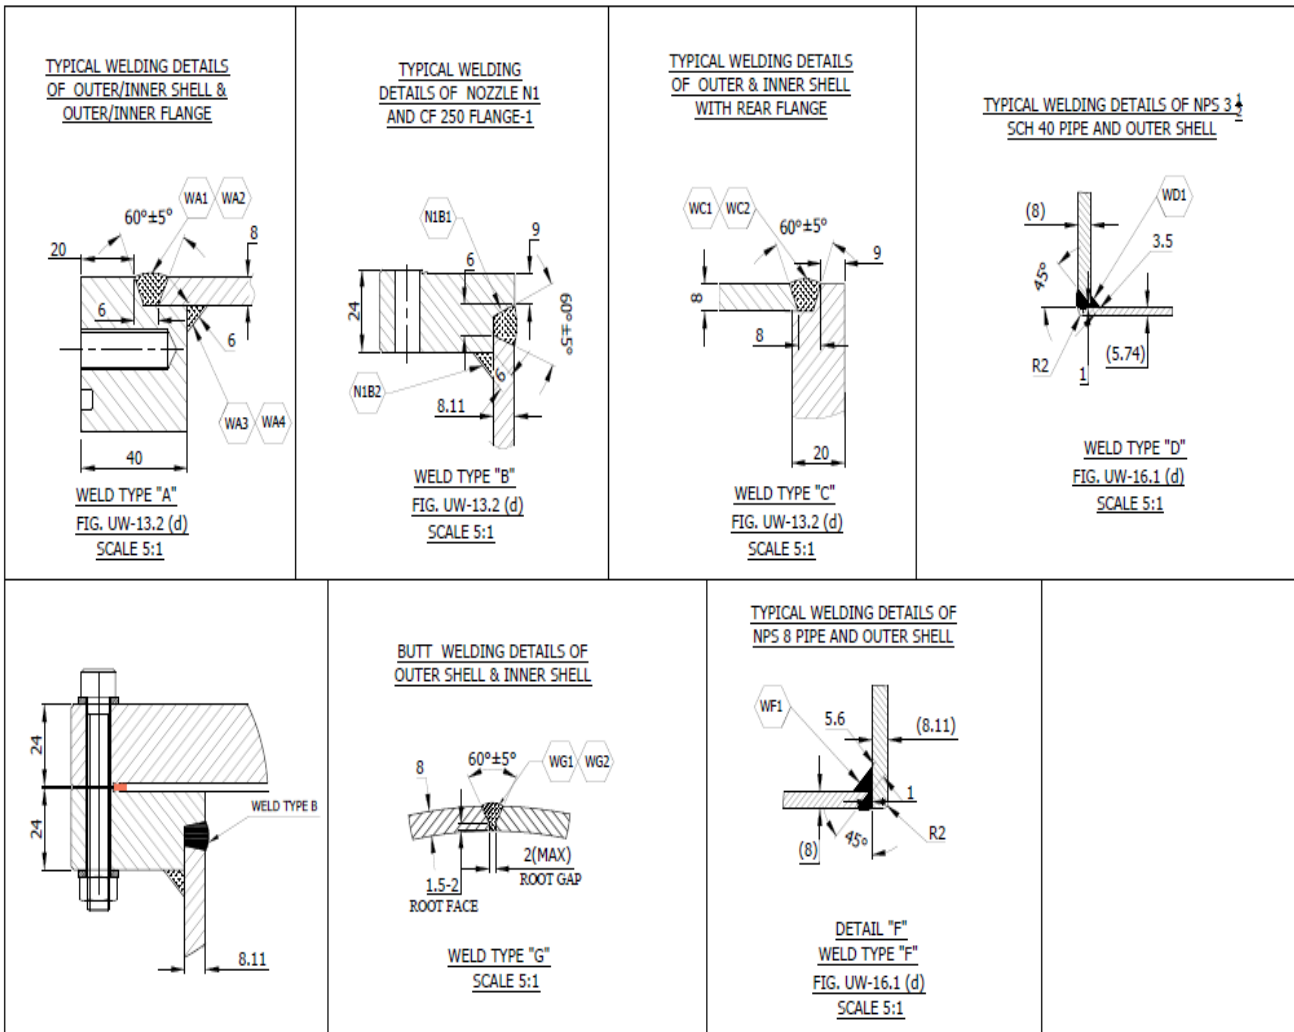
weld joints details in vacuum chamber [1]
